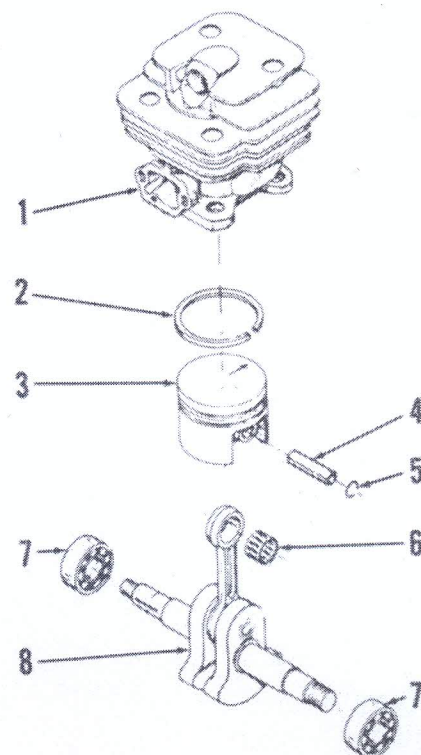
Exploded view of the cylinder, piston, cylinder and crankshaft assembly typical of all models.
